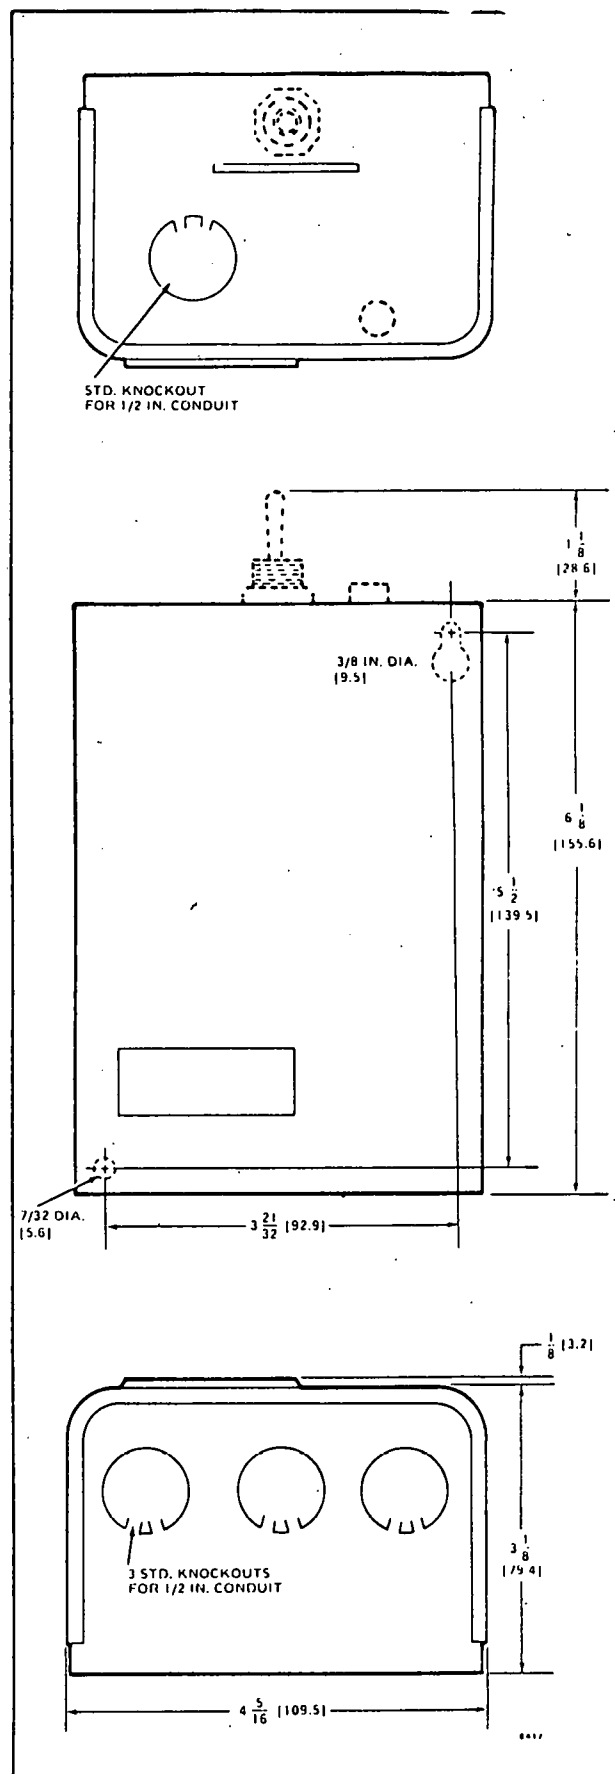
R7412 MOUNTING DIMENSIONS IN INCHES [MILLIMETRES IN BRACKETS].
